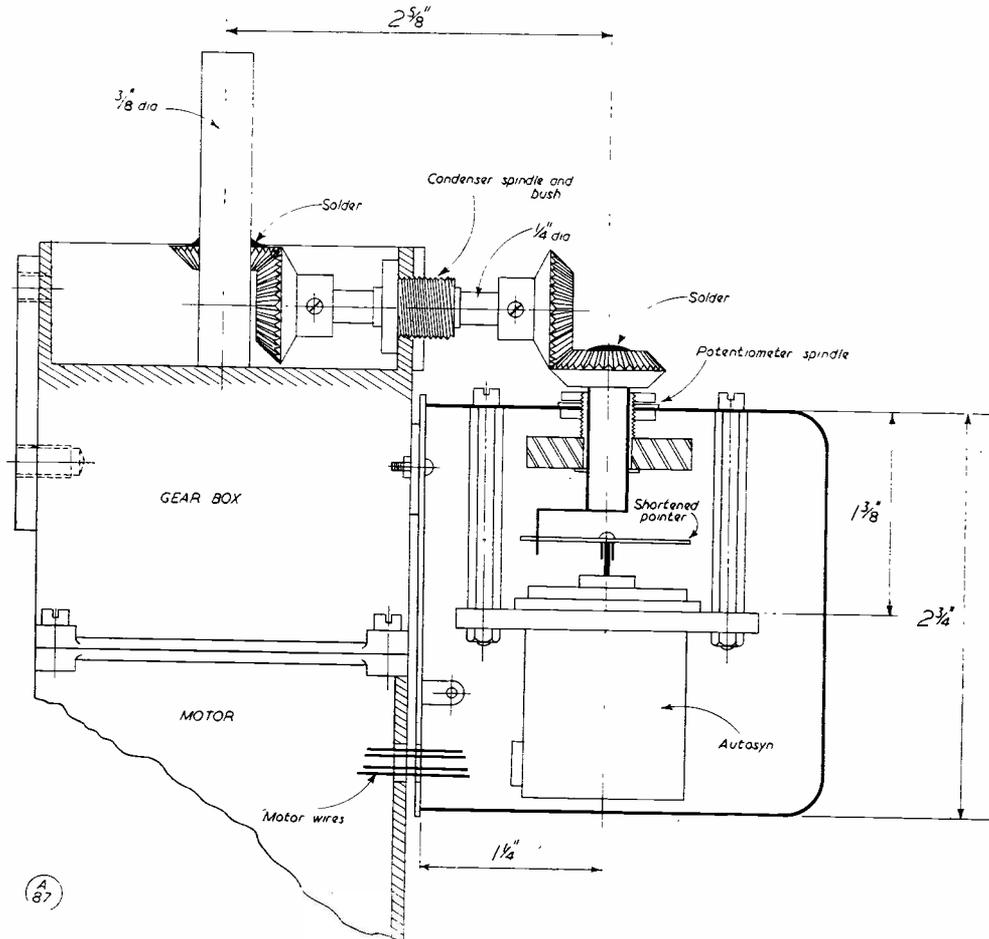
Showing mechanical arrangement of the Autosyn drive, mounted on the main motor housing at the base of the mast.
